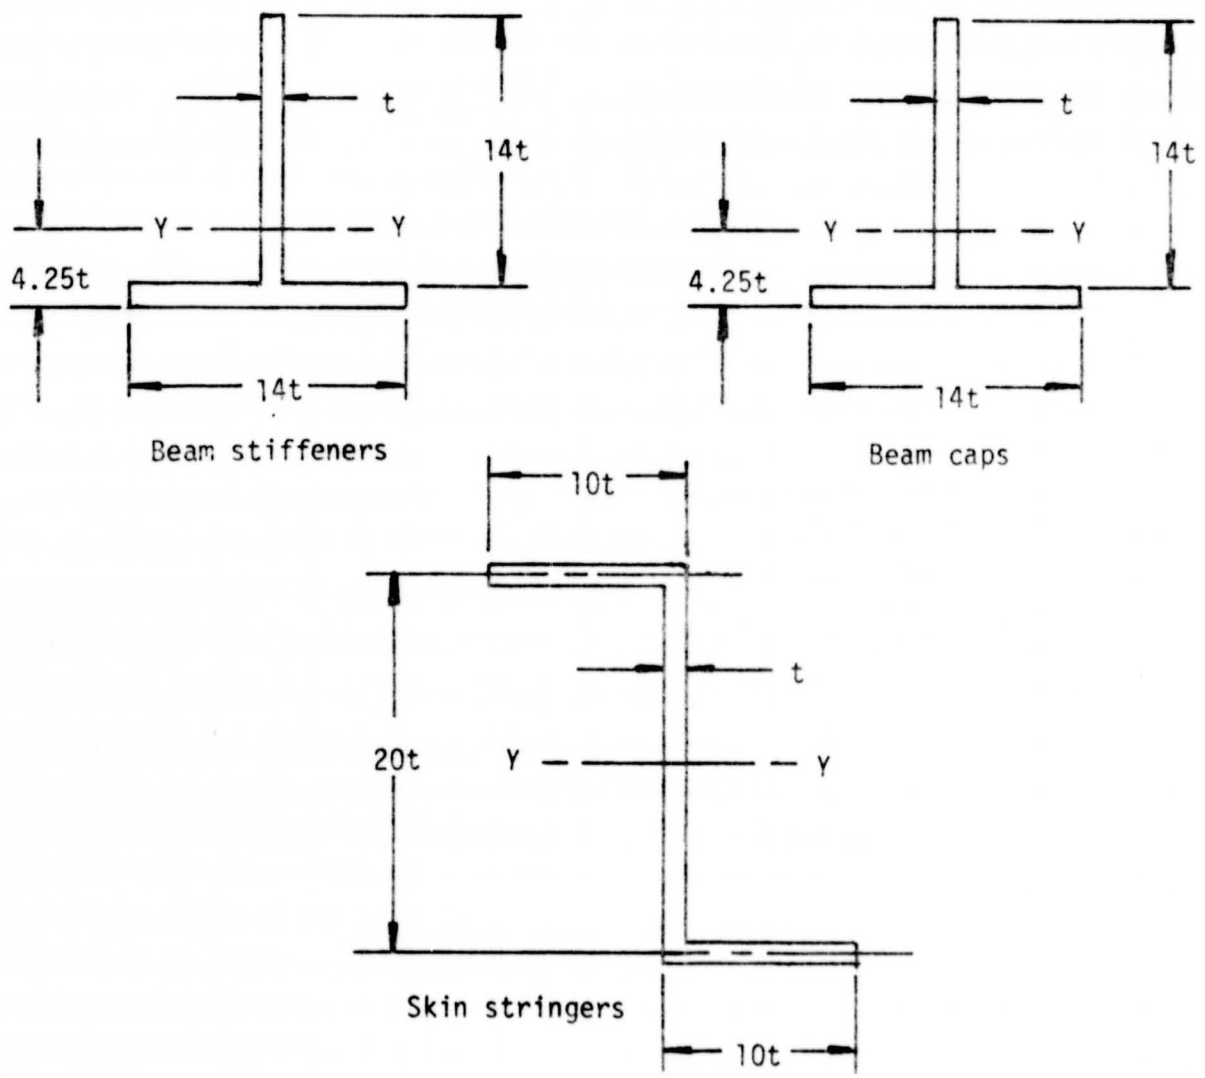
Cross-sections of beam stiffeners and caps, and skin stringers.
